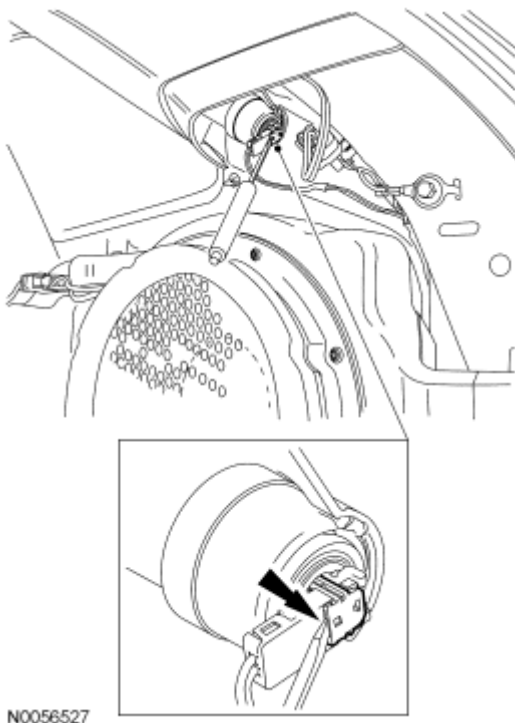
Locating Electrical Connector From Passenger Safety Canopy Module
